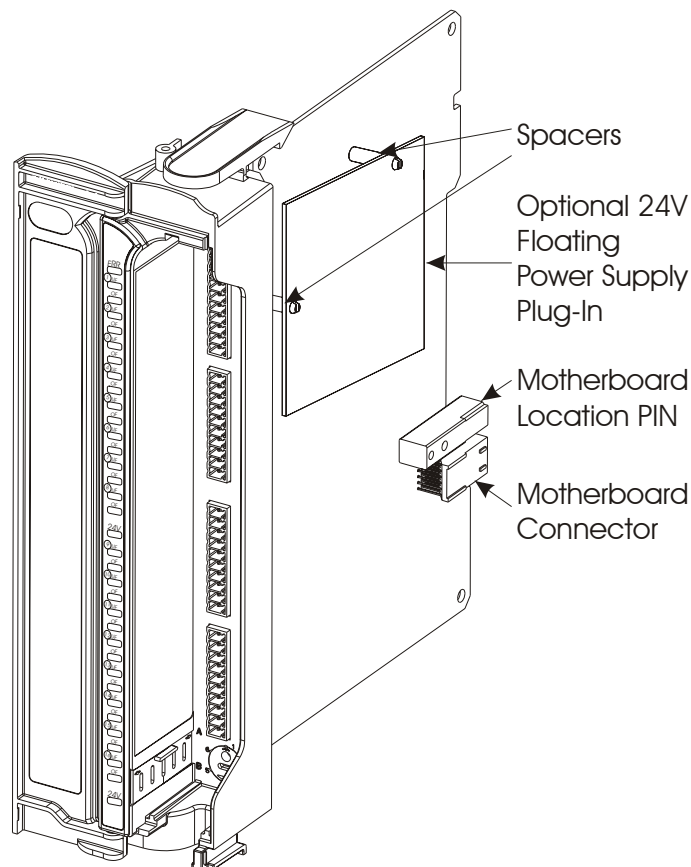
ACE3600 I/O Module with a 24V Floating Power Supply Plug-In
